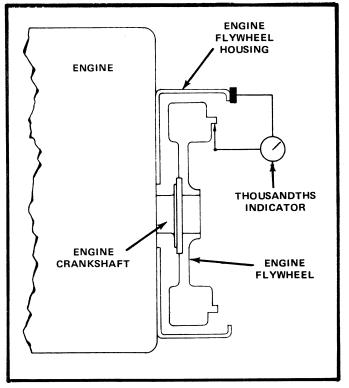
Checking the Driving Ring Pilot Bore of the Engine Flywheel.
